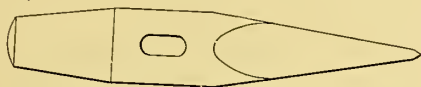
CENTER CUT CHISEL OR RIVET BUSTER.
